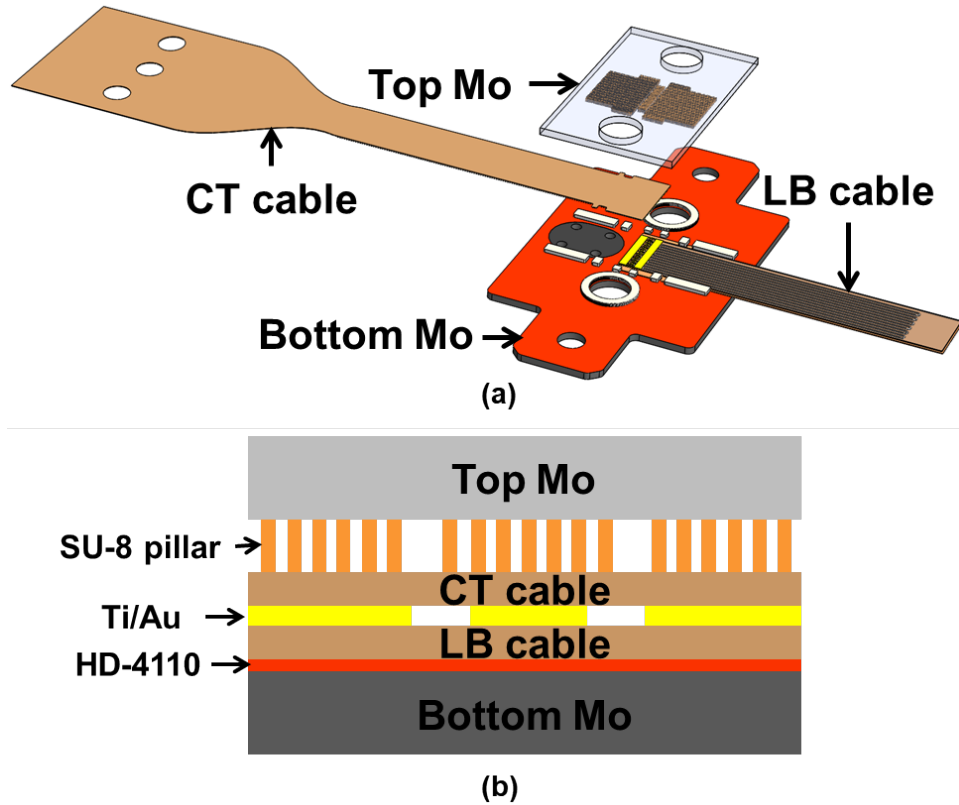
(a) 3-D view of disassembled connector assembly showing the components and assembly order. (b) Cross-section view in the connection region of the cables.
